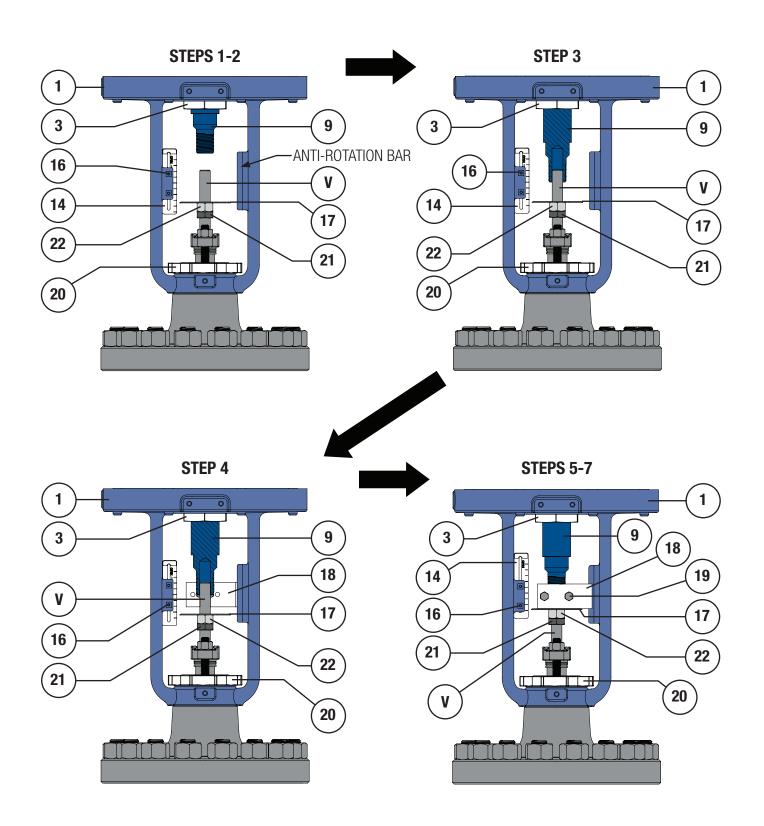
Connecting Block Installation (Size 3113 / 3-9/16" Yoke Boss Shown)
